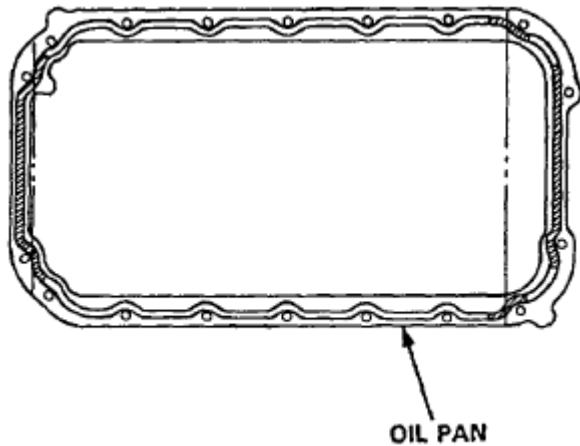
Applying Liquid Gasket To Block Mating Surfaces
